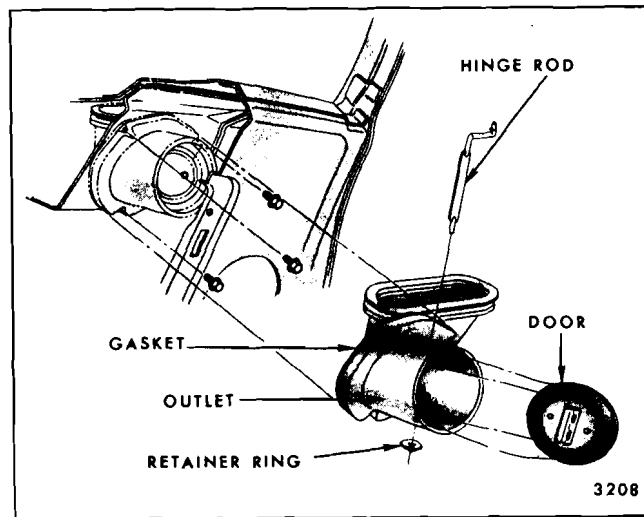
Shroud Center Duct Upper Air Outlet and Door - "F" Styles
